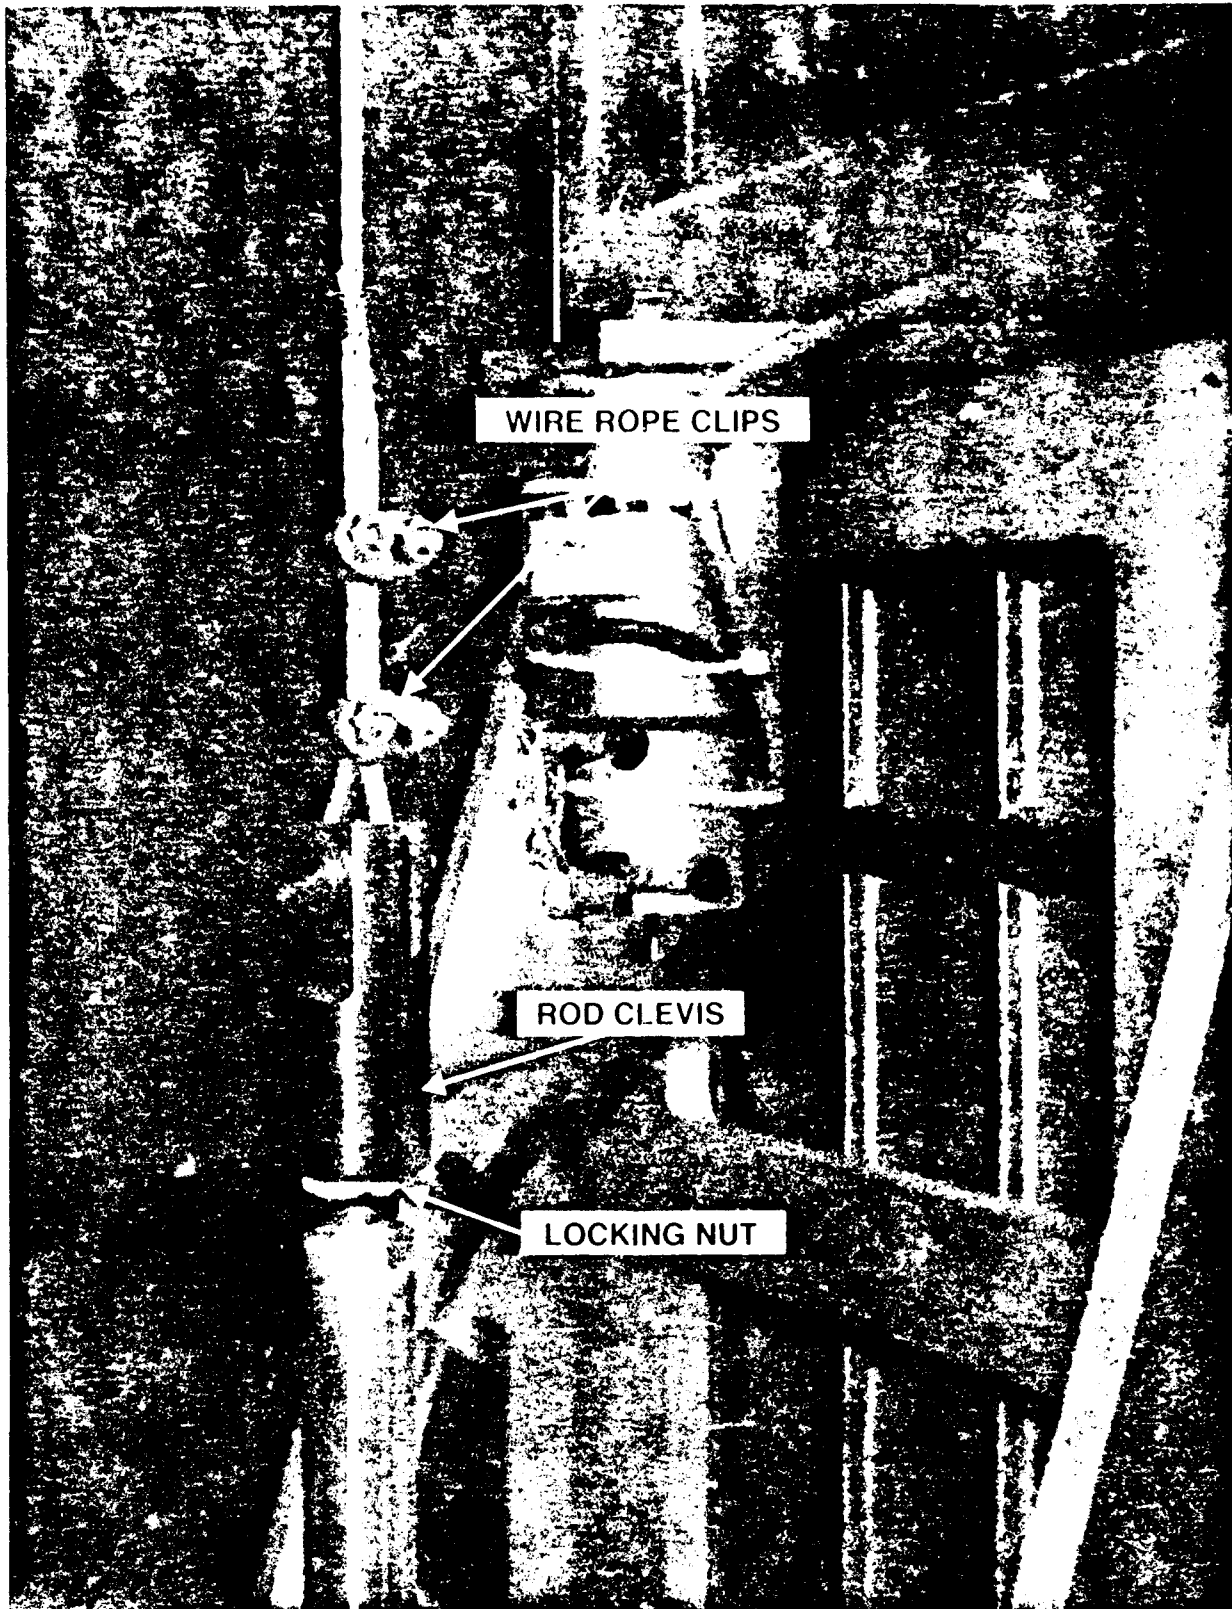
AIR CYLINDER SIDE - WIRE ROPE
